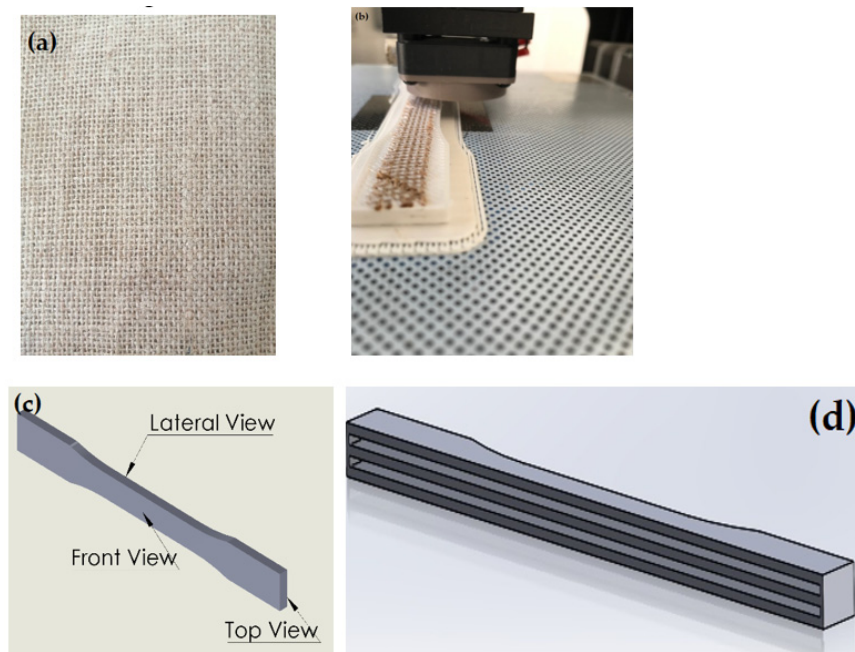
Photographs and schematic representations of: (a) jute fabrics, (b) 3D printing on jute fabrics, (c) tensile specimens' solid-like configuration, and (d) specimens with gaps to place the jute fabrics. The solid-like picture also presents the viewing directions for tomography scans.
